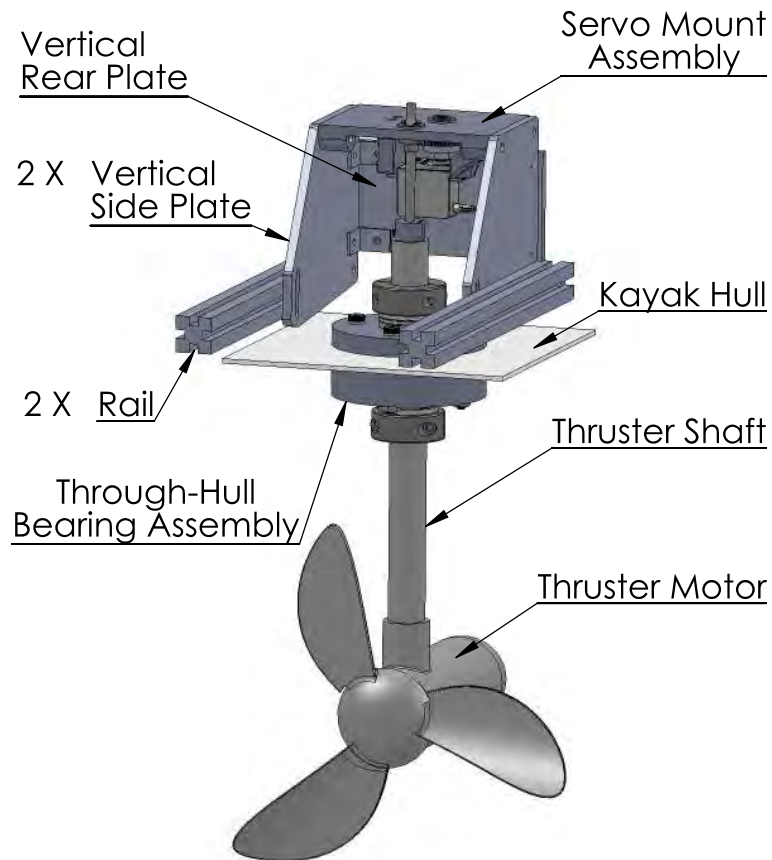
Kayak thruster assembly. The thruster goes through the Through-Hull Bearing Assembly and is rotated with a servo-motor attached to the Servo Mount Assembly. The Servo Mount Assembly is attached to the kayak with the Vertical Side Plates that mount to the rails that run the length of the kayak and are bolted to the hull. The Vertical Rear Plate provides rigidity to the assembly.
